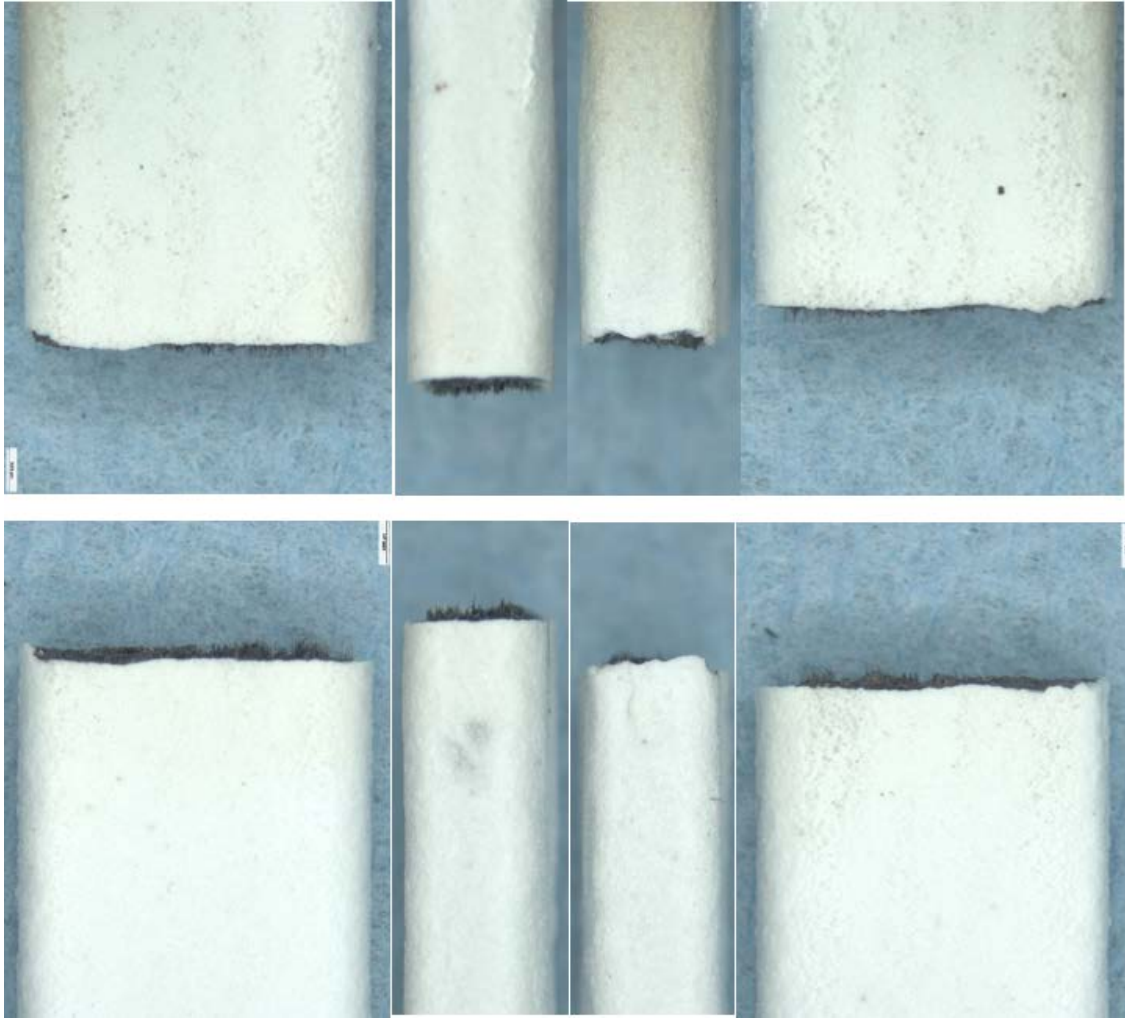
Fracture surfaces of specimen P15006-12, tested in fatigue at 1200°C in steam.
